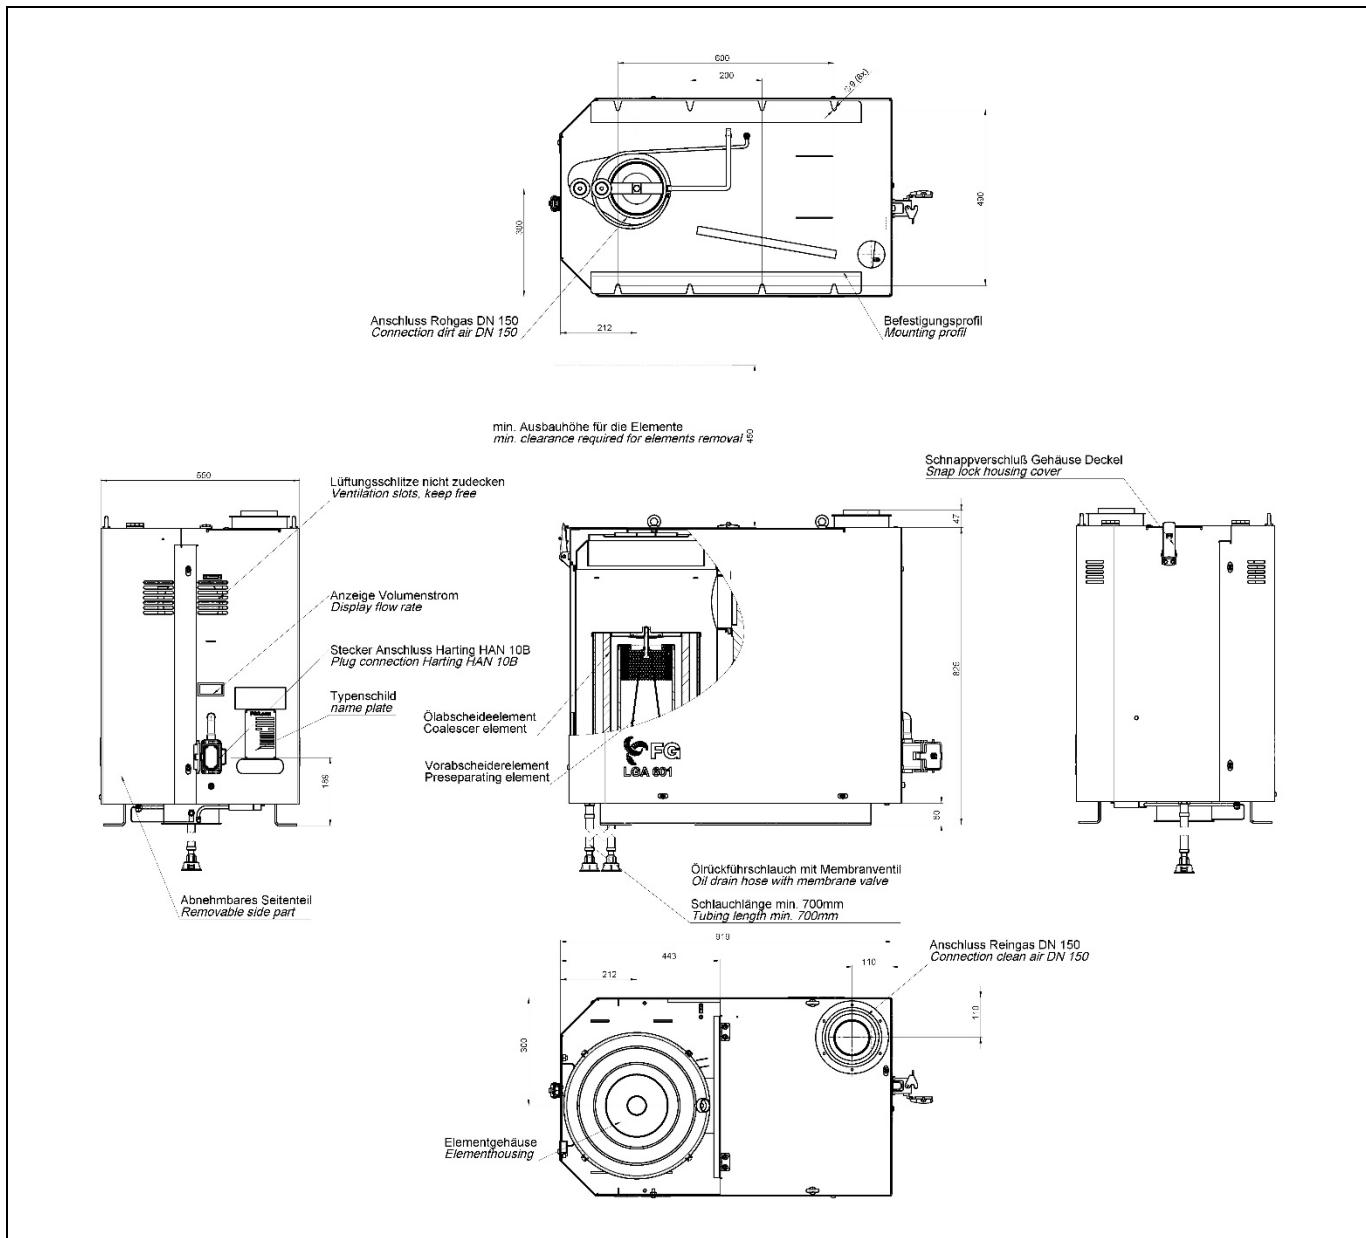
Dimension drawing of the LGA 601 FU / FUW
